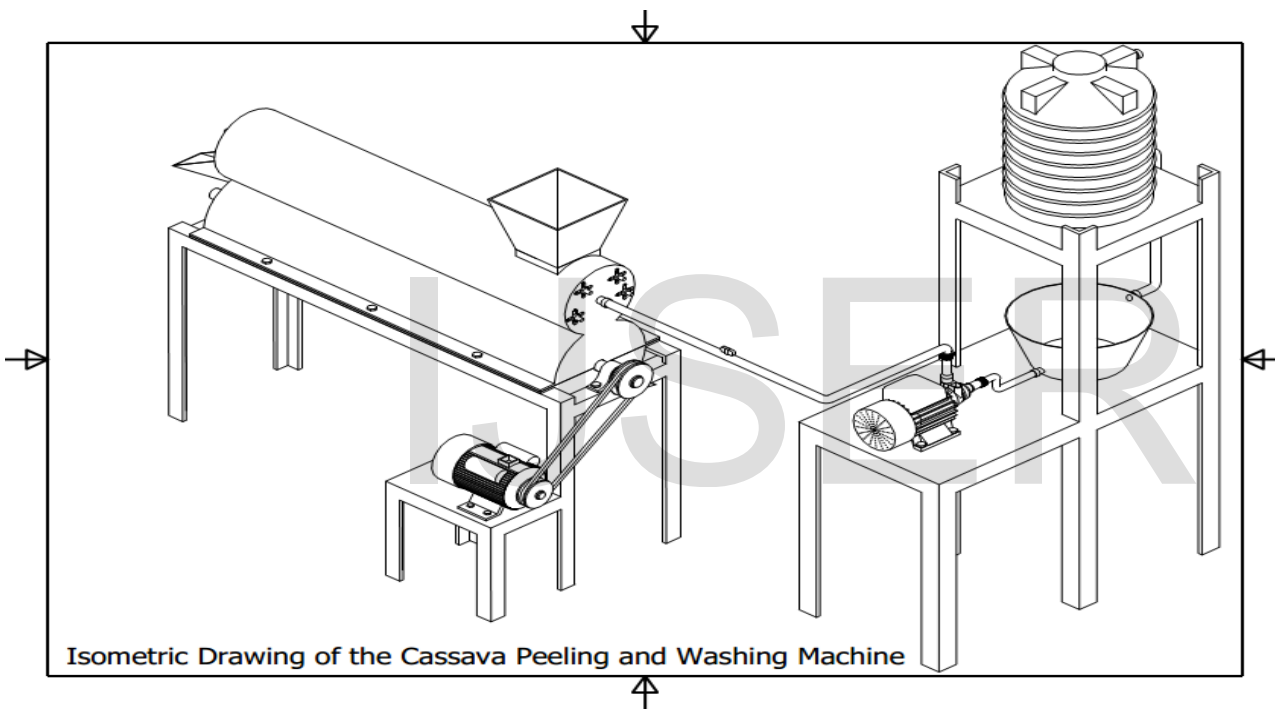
Isometric View of Cassava Peeling and Washing Machine
